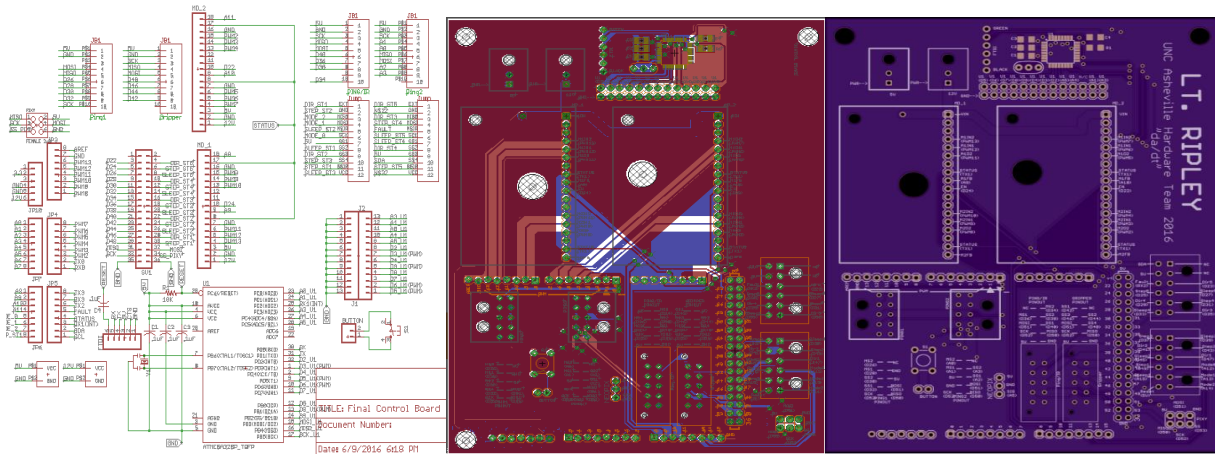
The master control board. Left to right: The schematic, board design, and finished PCB.
